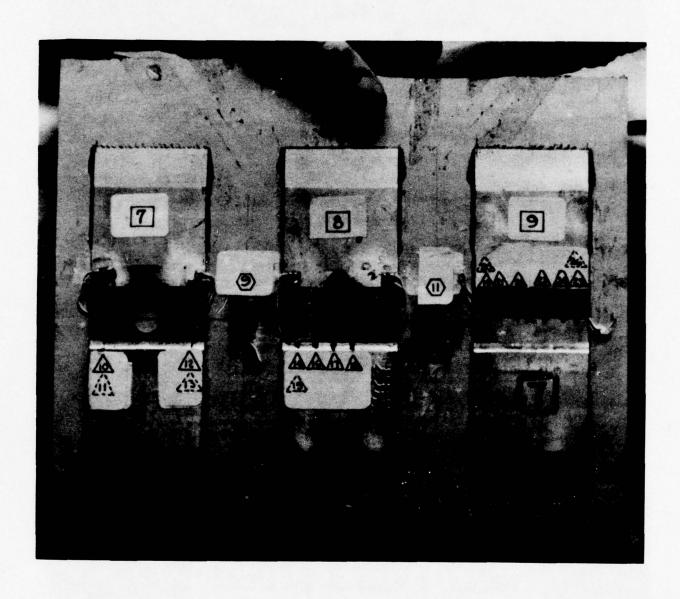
Photograph of Specimen AFCG-2 Side 1 Detail
